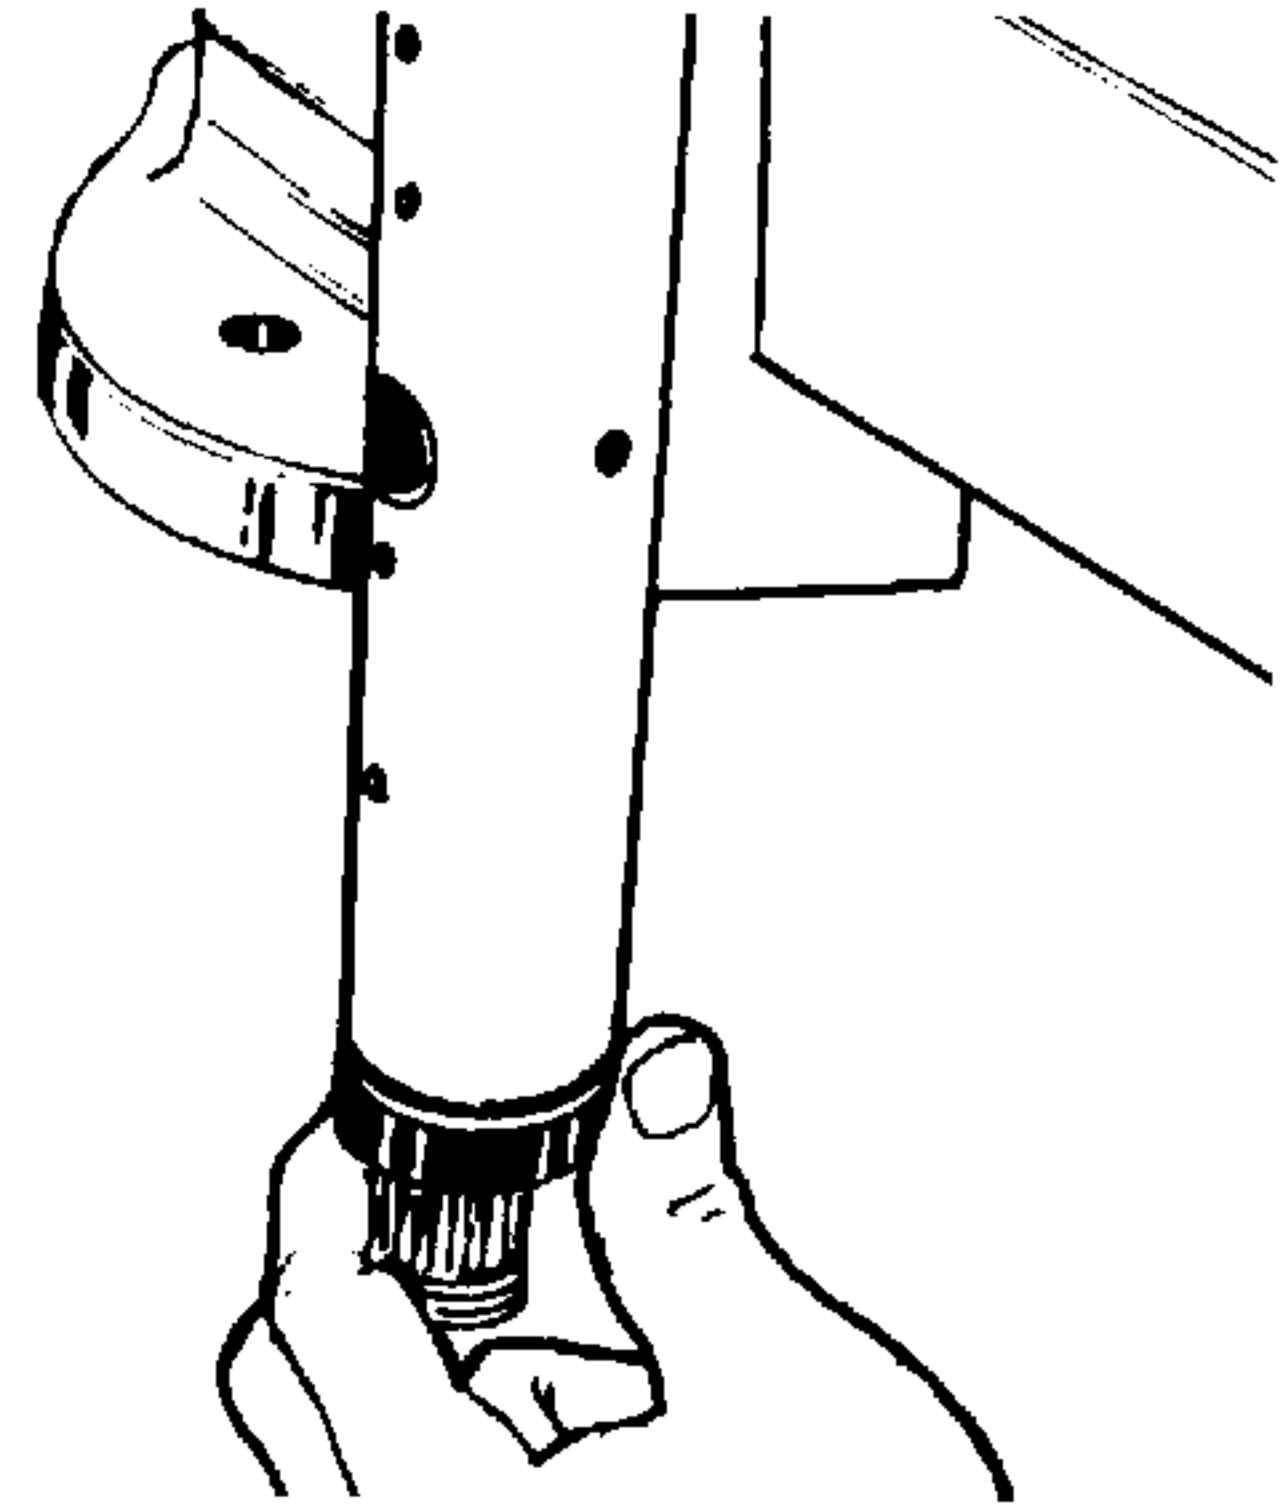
Installing Dust Seal on Upper Cover and Tube Assembly.
